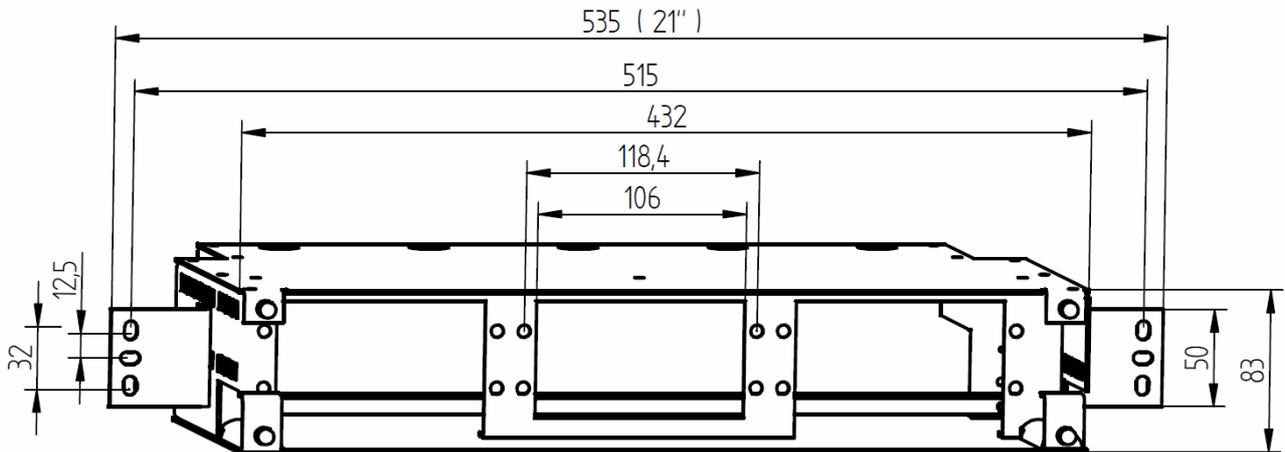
2U chassis with holders for 21" rail spacing, version for 3 boxes 1LGX / 3U
